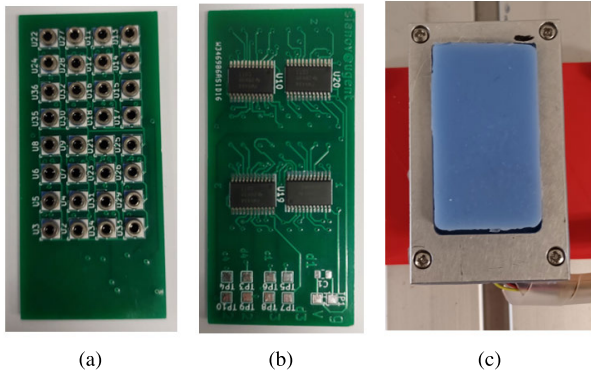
Sensor design. (a) PCB: top view. (b) PCB: bottom view. (c) Assembled tactile sensor.
